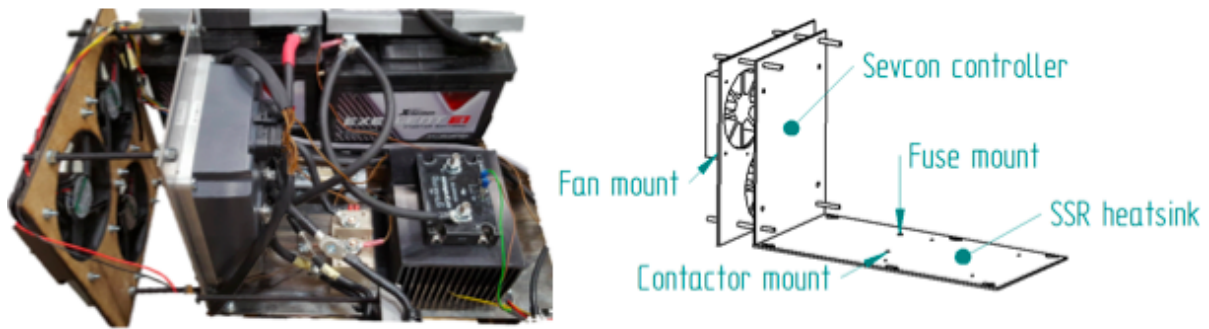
Drawing and picture of Sevcon controller mount with fuse mount, contacor and SSR heatsink.
